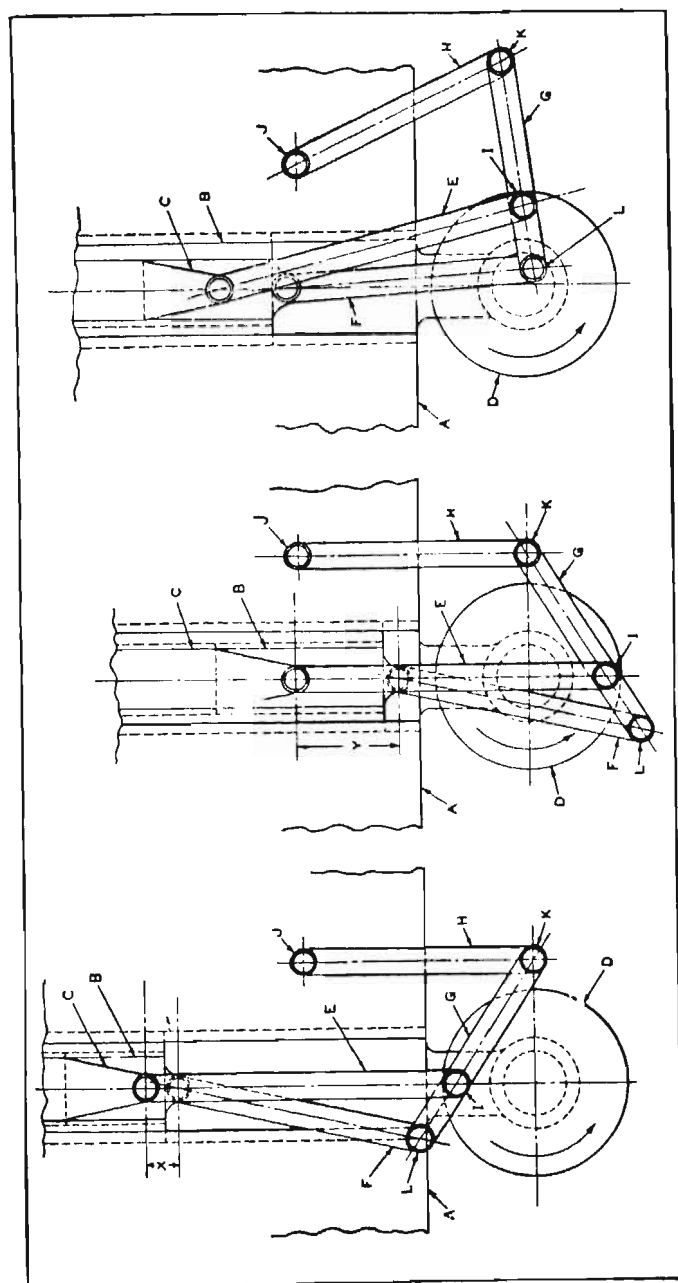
(Left) Mechanism with Two Slides B and C Driven by One Crankpin I Shown at Top Dead Center Position. (Center) Mechanism with Crankpin I Shown at Bottom Dead Center Position. (Right) Mechanism Shown with Slides in Position Occupied After Crankpin I has made Three-fourths Revolution from Position Shown in Left View.
